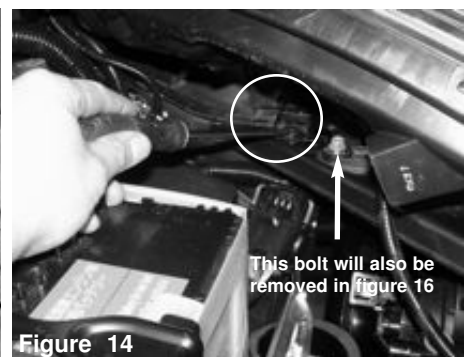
Remove the plastic clip underneath the drivers side headlight that is attached to the resonator tube.
